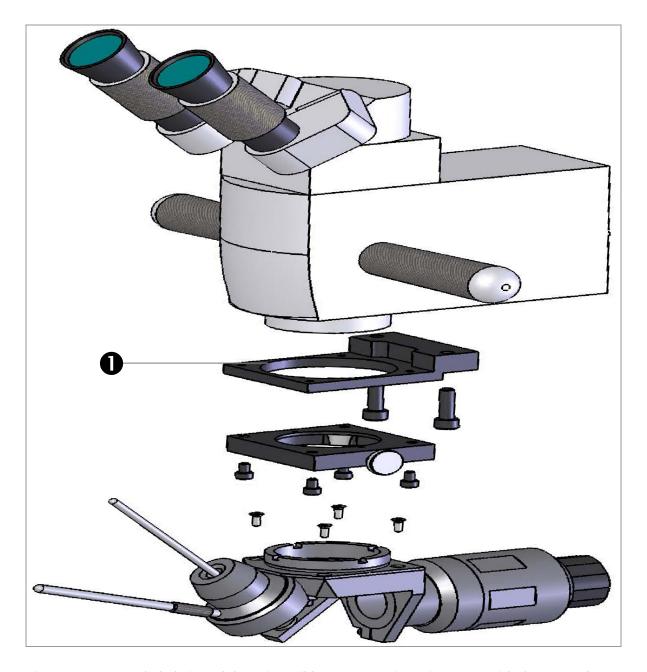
Exploded view of the Leica-Wild M690 operating microscope with the MINI POINT
